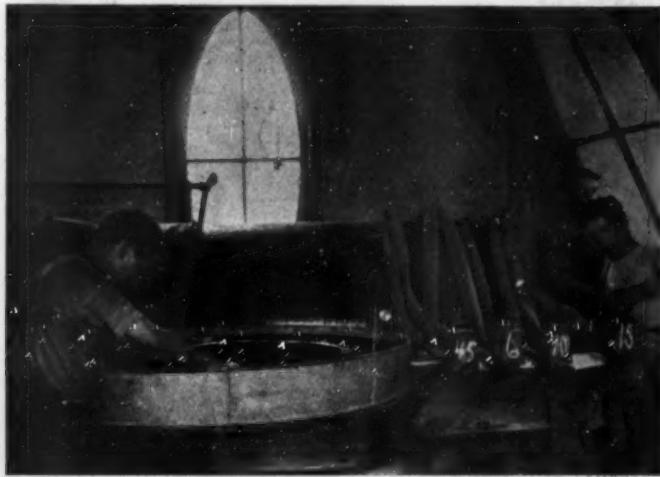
TESTING AND VULCANIZING INNER TUBES.
